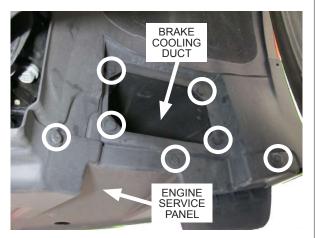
b: Remove brake cooling duct and engine service panel fasteners
